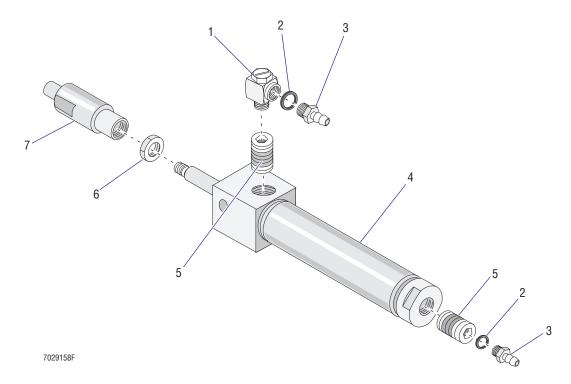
Air Cylinder and Related Hardware for Segmenting Valve Middle Pad (See Table 8.2-35)
